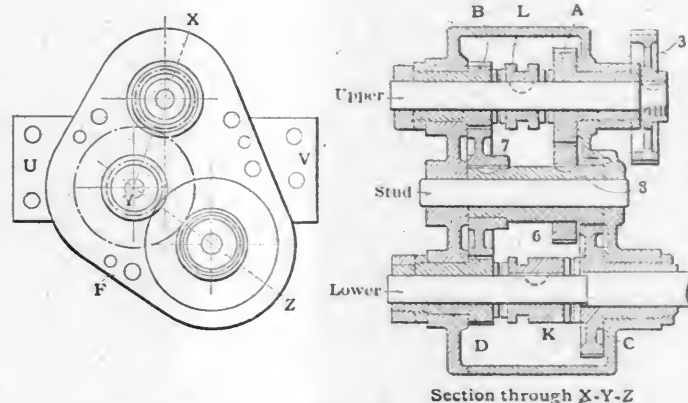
THE FOUR-SPEED CHANGE GEAR MECHANISM.
